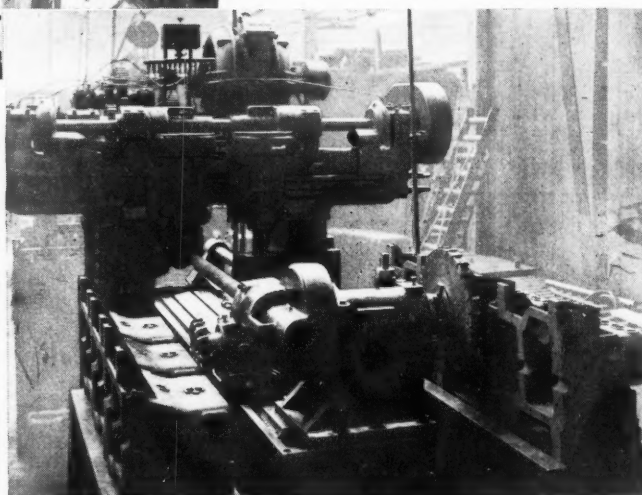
(right)—In the Bean plant an Ingersoll milling machine was especially adapted to handle work ordinarily too large for it
